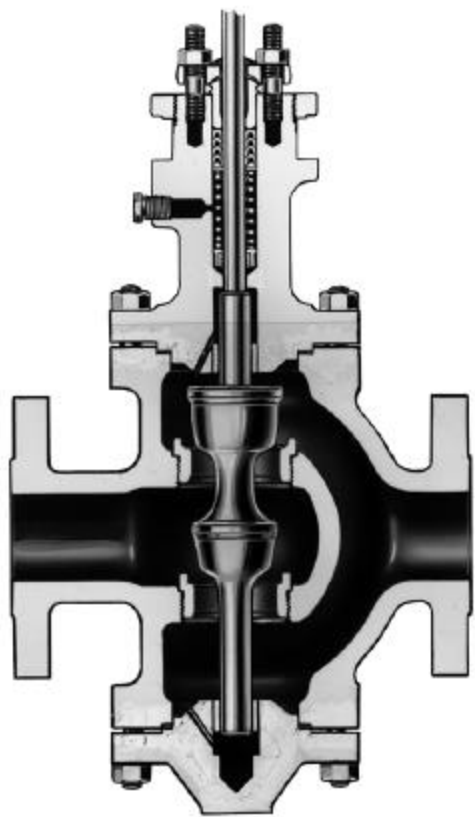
Cross-section of a globe valve body assembly with a balanced plug. Courtesy of Fisher-Rosemont.
